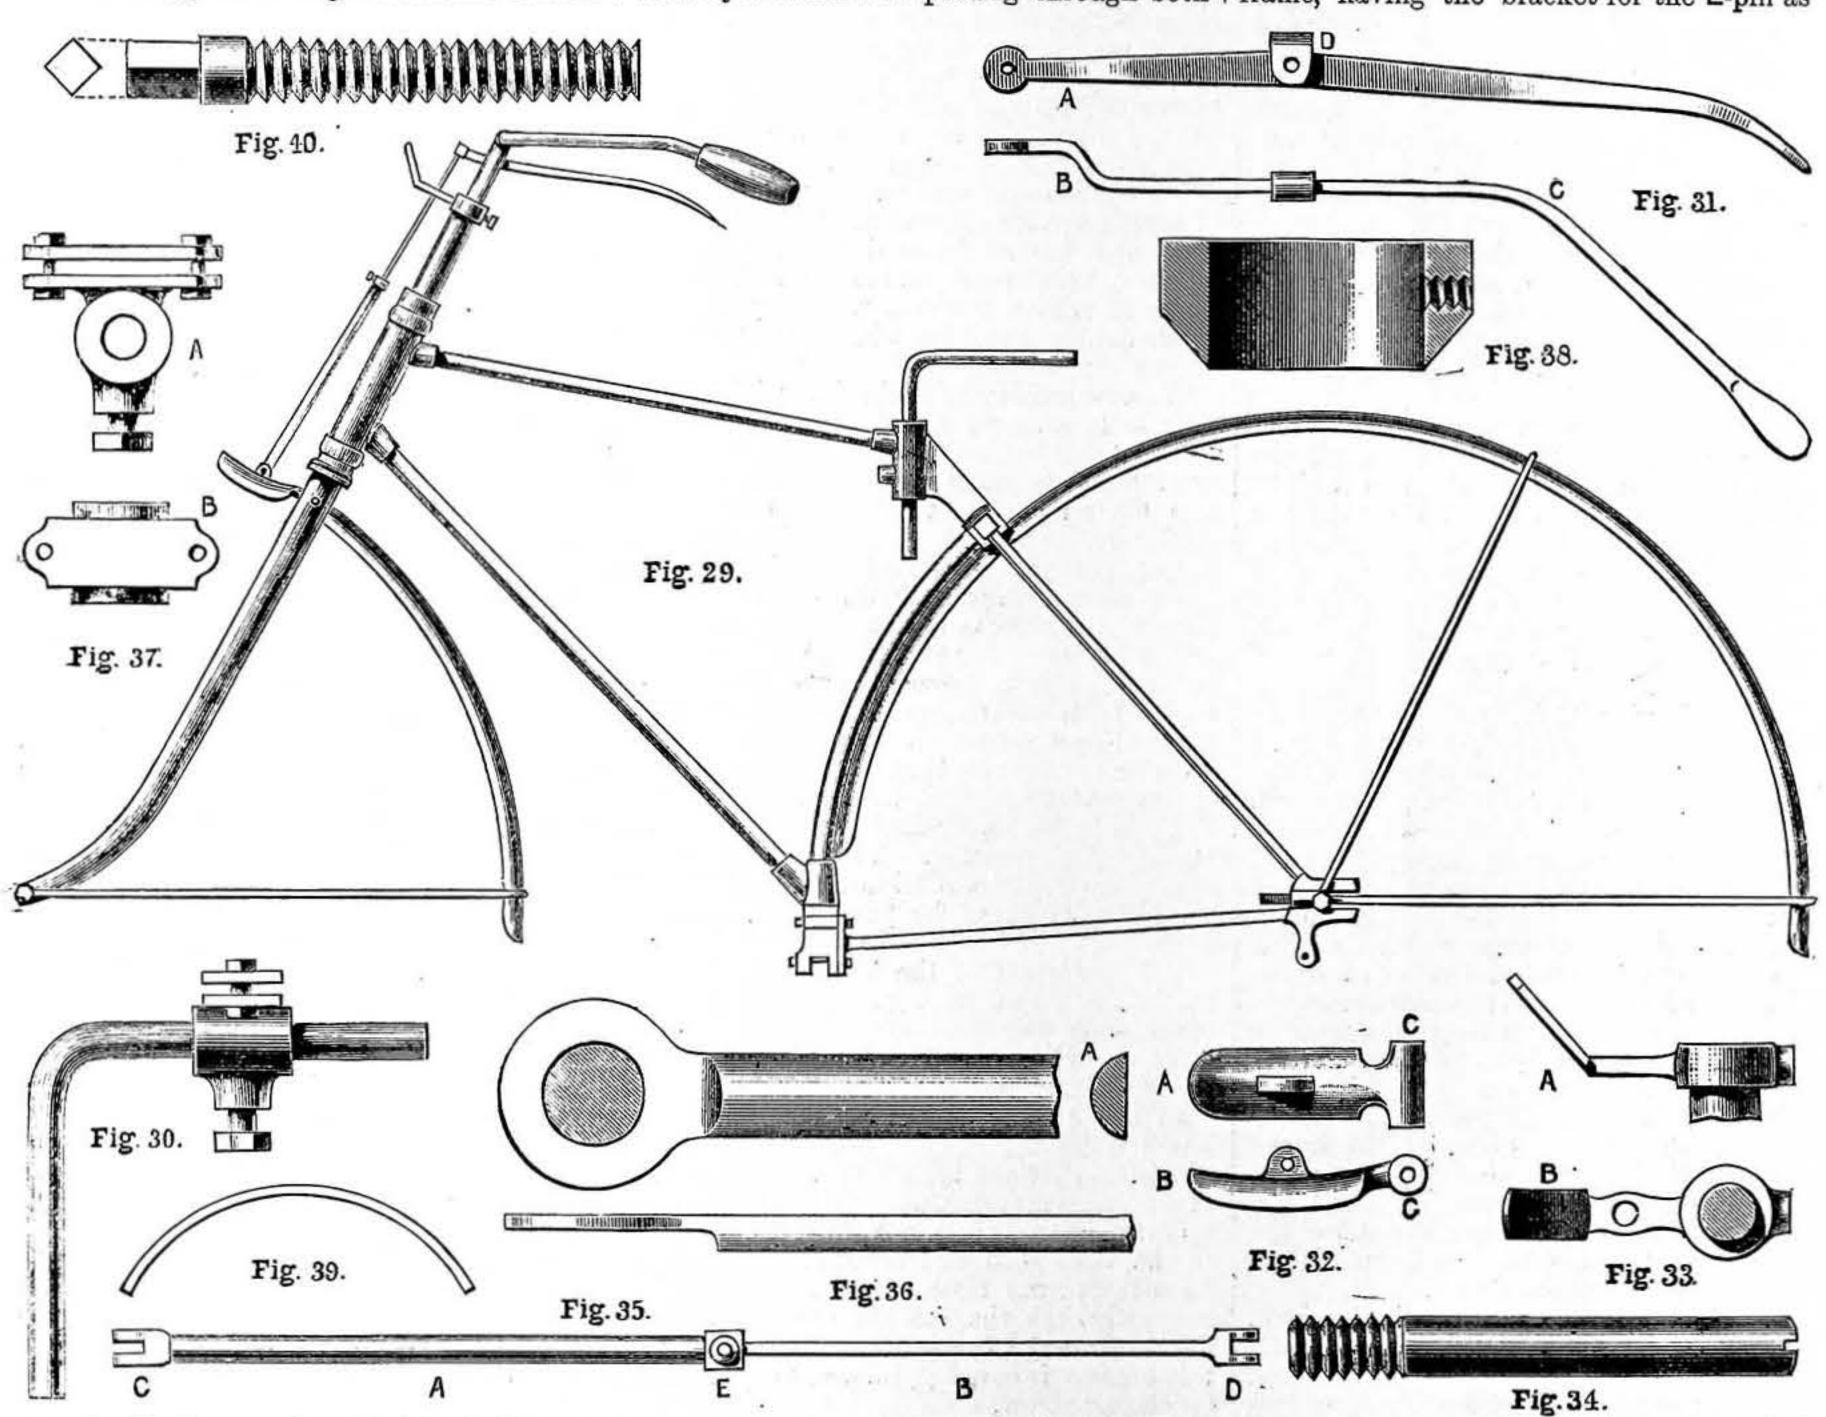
The Frame minus the Wheels (\frac{1}{8} full size). Fig. 30.—L-Pin and Bracket. Fig. 31.—Brake Lever. Fig. 32.—Spoon. Fig. 33.—Lamp Bracket. Fig. 34.—Spoon Hinging-pin. Fig. 35.—Brake-rod. Fig. 36.—Mud-guard Stay Ends. Fig. 37.—Spring Bracket. Fig. 38.—Adjusting Collar. Fig. 39.
